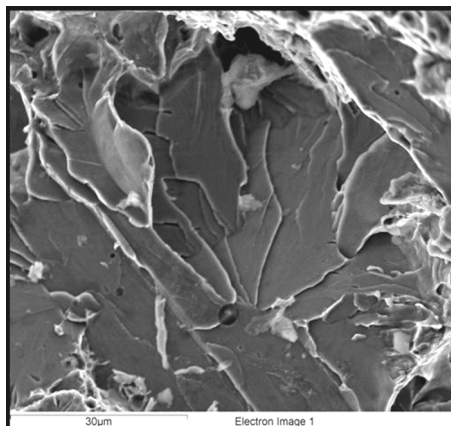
Non-metallic inclusion initiating a cleavage fracture in weld metal
